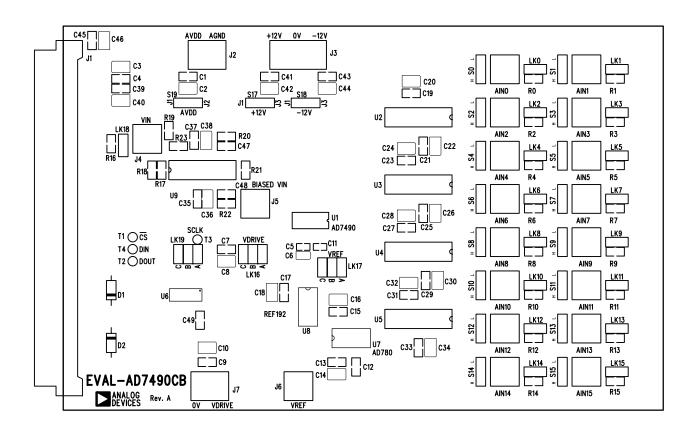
AD7490 Evaluation Board Component Placement Drawing.
